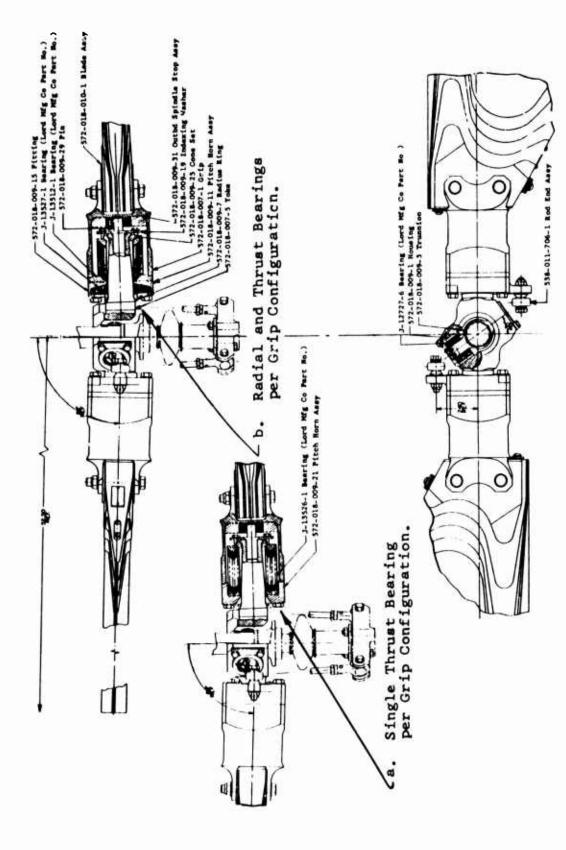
Elastomeric Bearing Tail Rotor Configurations.
